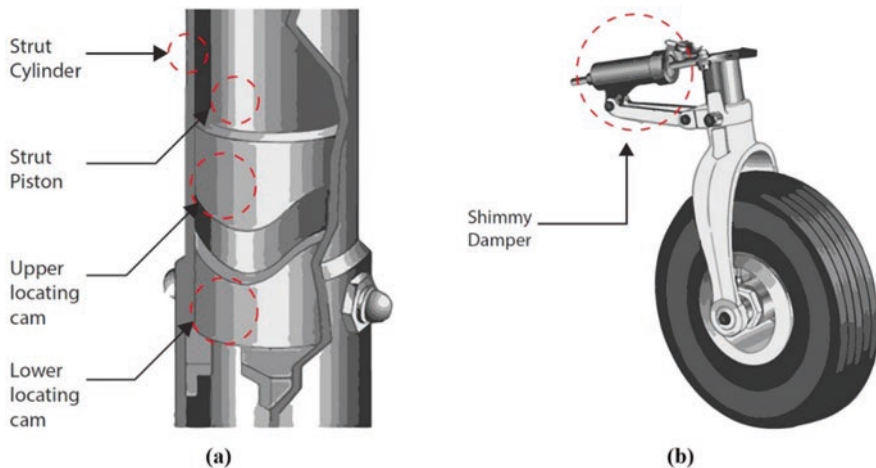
(a) Mechanism of centering cams and (b) shimmy damper system
